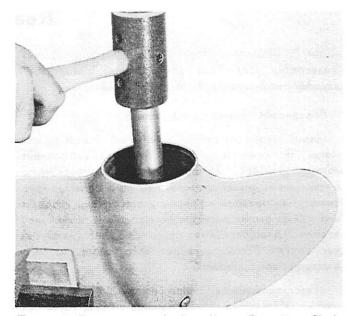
Removing and Installing Propeller Shaft Needle Bearing
